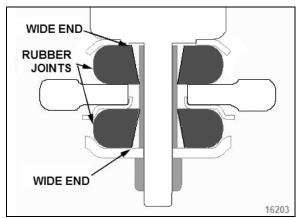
LOWER SHOCK MOUNTING BUSHINGS
